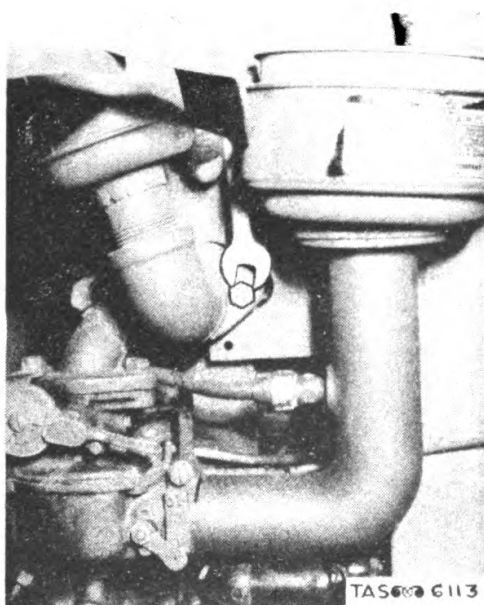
Removing Carburetor Mounting Cap Screws Holding Manifold.
